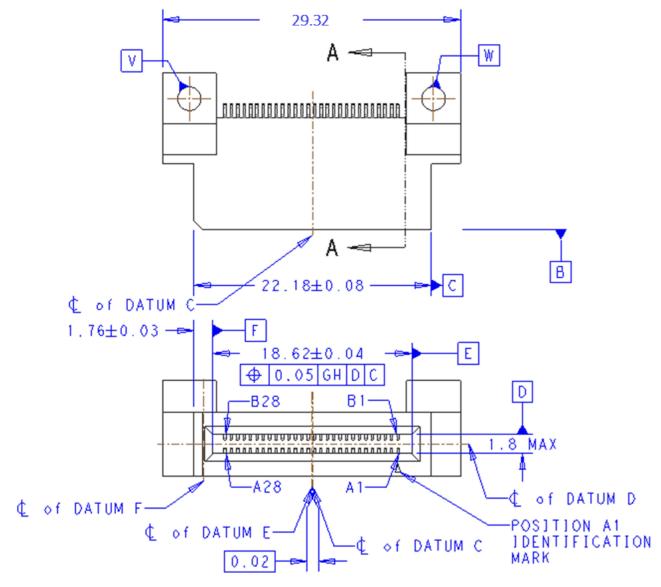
1C STRADDLE MOUNT CONNECTOR DIMENSIONS - FRONT VIEW (MM)
